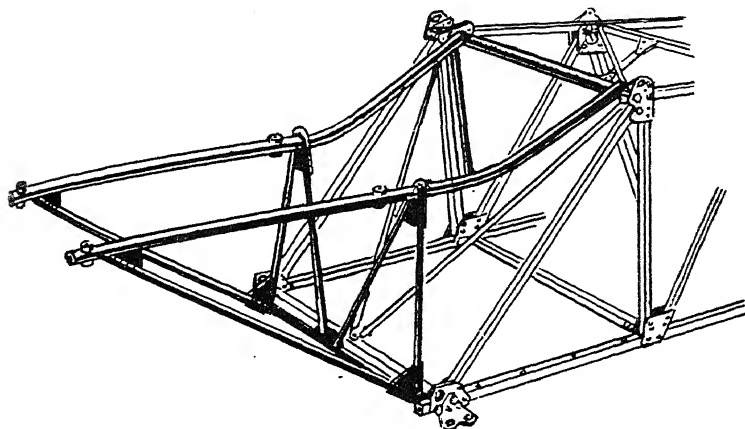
WESTLAND "WIDGEON" ENGINE MOUNTING
